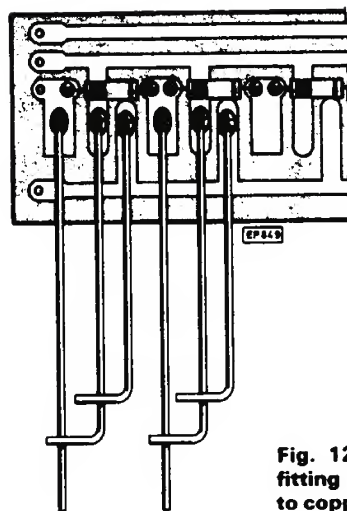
Showing method of fitting key contacts (soldered to copper side)
